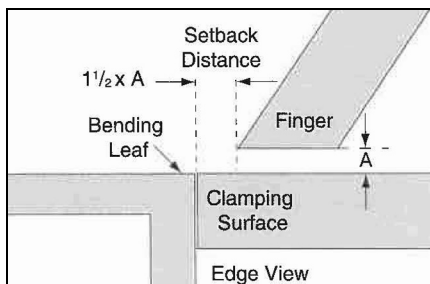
Determining setback distance for workpieces 22 gauge and thinner.
